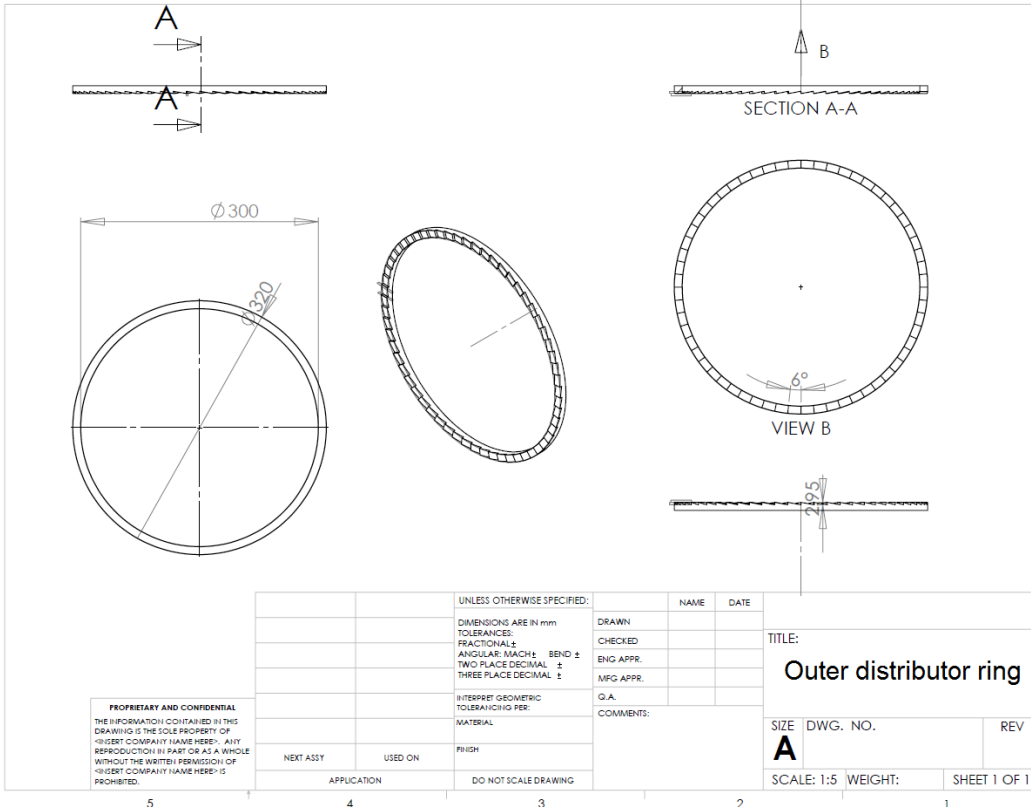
Design drawing of outer ring of annular spiral distributor
